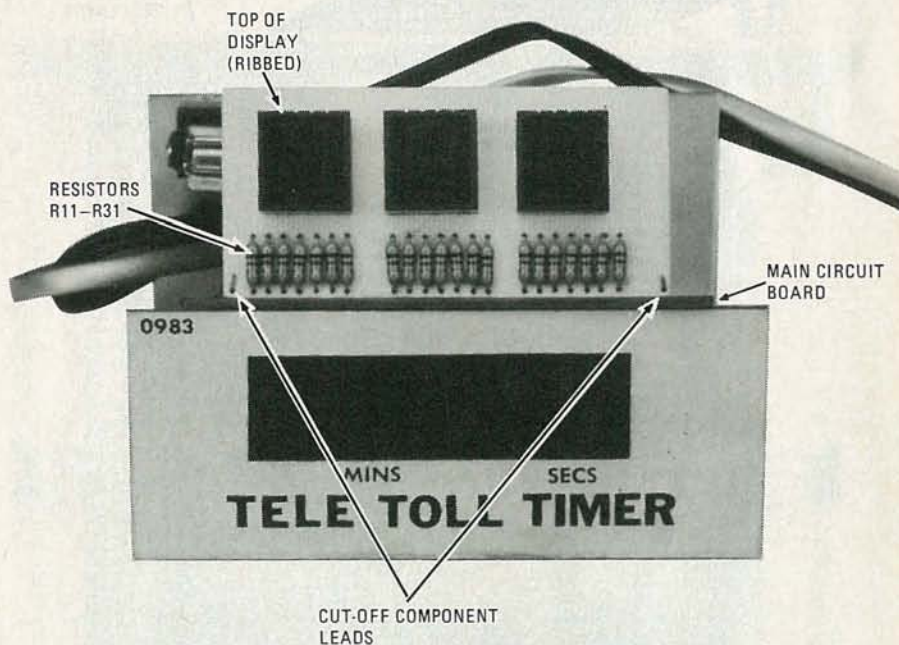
THE DISPLAY BOARD installed in the main board. Note: The ribbed surface marks the top of the seven-segment displays. Resistor leads are used to make connection between the main and display boards. The leads are also used for mounting support.
